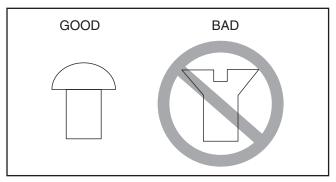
Correct and incorrect screw types for mounting faceplate to workpiece.
